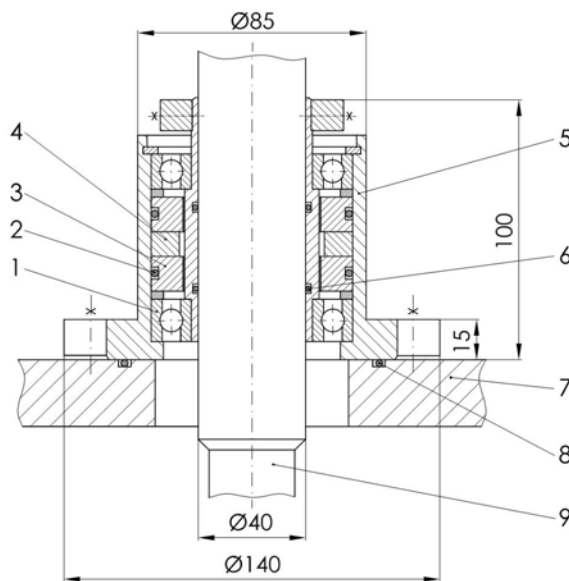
Sketch of MF feedthrough; Components: 1 – bearings; 2, 6, 8 - “O” ring; 3 – pole pieces; 4 – permanent magnet; 5 – seal casing; 7 – mixer casing; 9 - shaft
